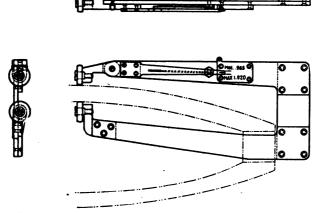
Sketch showing type of gauge used to inspect thickness of wall of shell and shrapnel.
